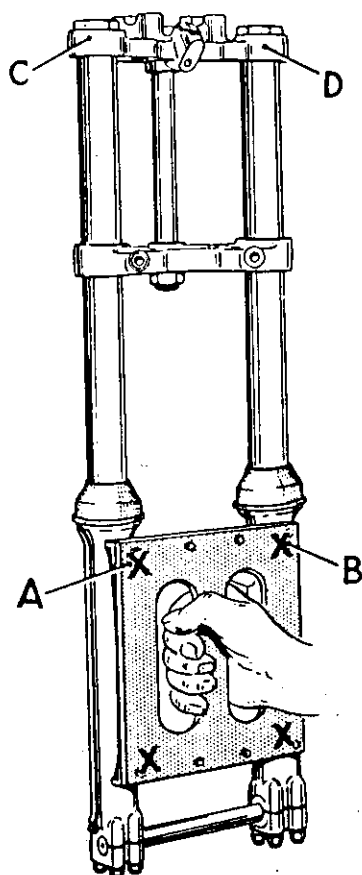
Checking fork alignment with service tool No. 61-6025.
